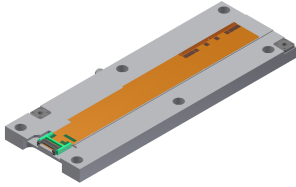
Long flexible PCB 'Origami CE' alignment jig
